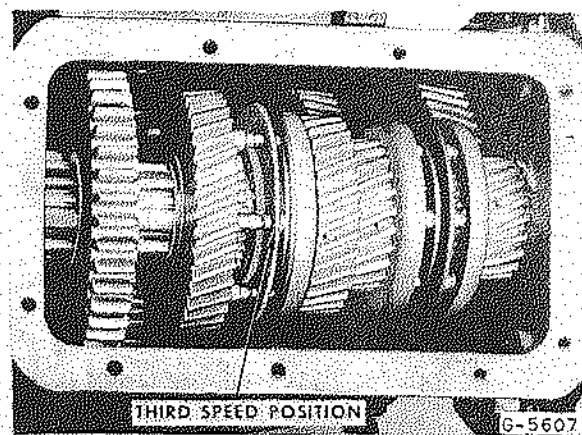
Synchronizer Positions With Transmission in Third Gear
